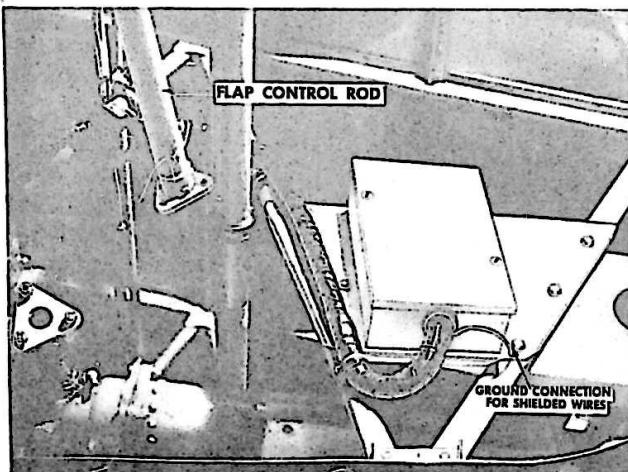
Access Hole and Nacelle "J" Box, Inboard Engines, B-17 Airplanes
